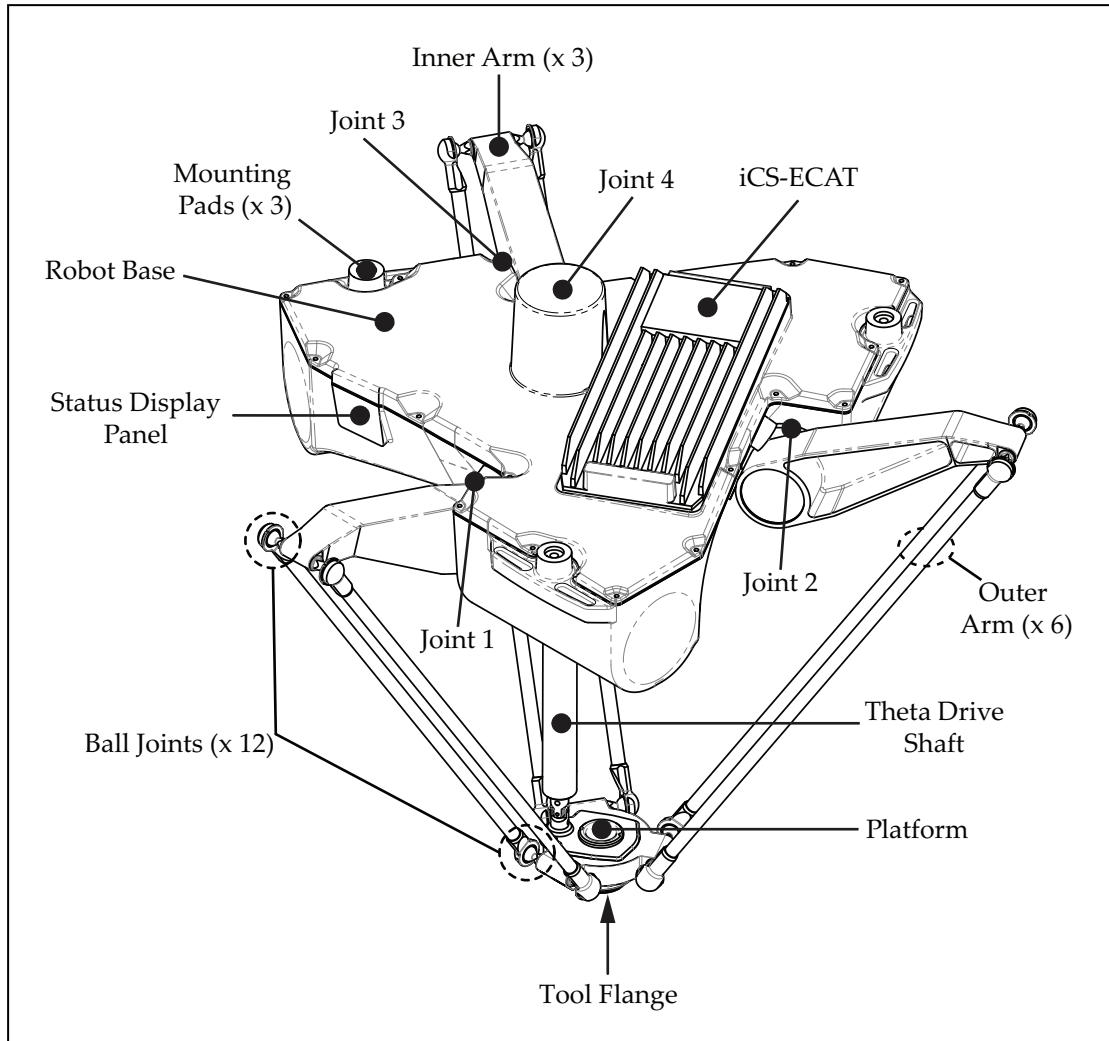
iX3 565 Robot with EtherCAT (4 axis model shown)
